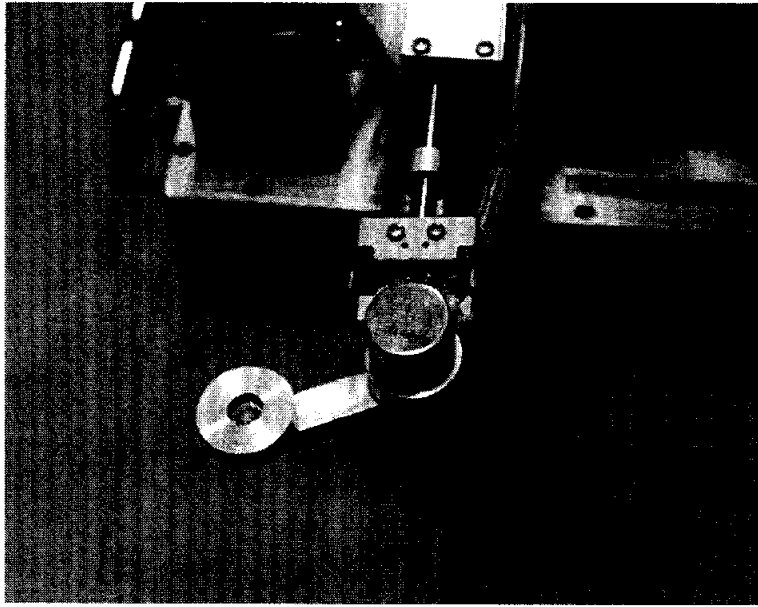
The smooth welding line seam tracking sensor
